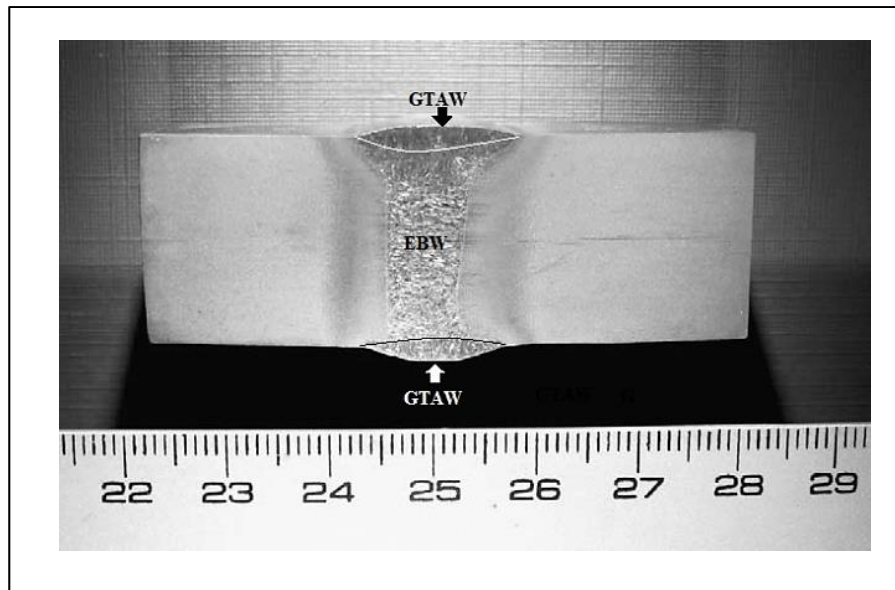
The macro section of the EB weldment (scale in cm) (Srinivasan, Sharkawy et Dietzel, 2004)
